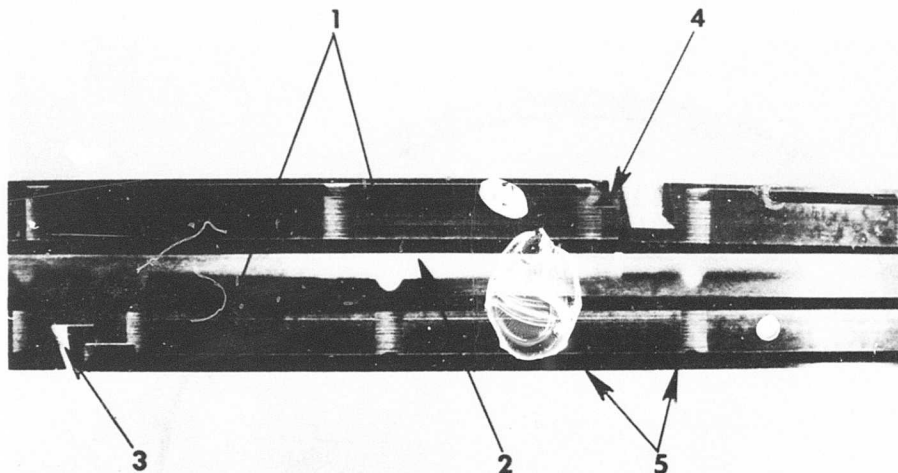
Edge View of Regenerator I.D. Ring Seal, Back-to-Back Segmented Carbon Seal, Showing (1) Carbon Segments, (2) Thrust Plates, (3) Step Joint, (4) Damaged Step Joint, and (5) Sealing Lips, Axial and Radial.
